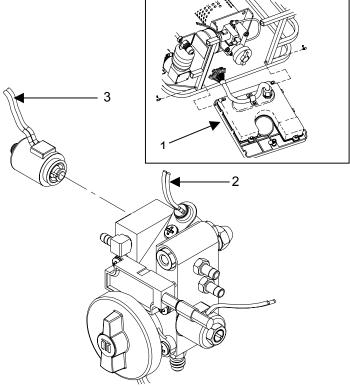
Test the Air/Fill Solenoid Valve (MBU-V3 shown)
